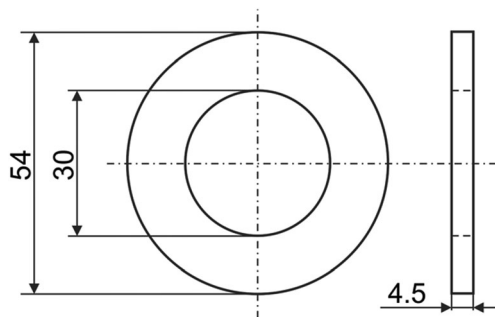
Dimensions of the alumina workpiece applied in the grinding tests
